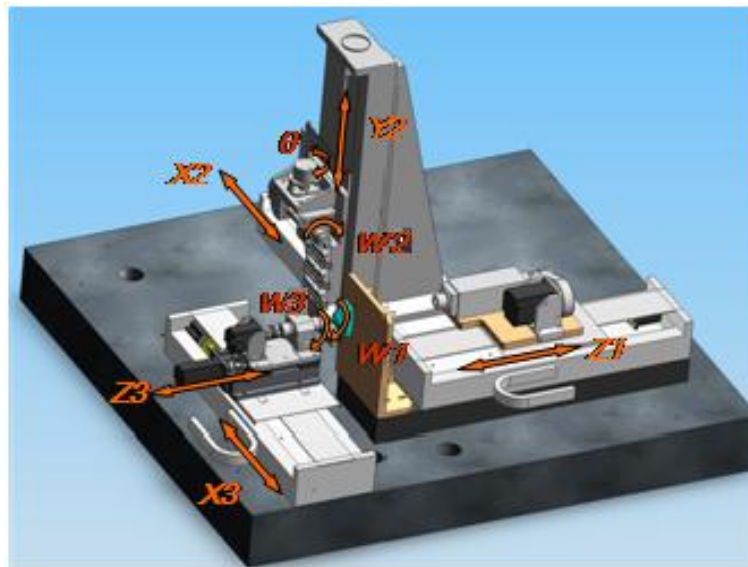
The CAD model of our CNC Turn-Mill-hob Machining Center
